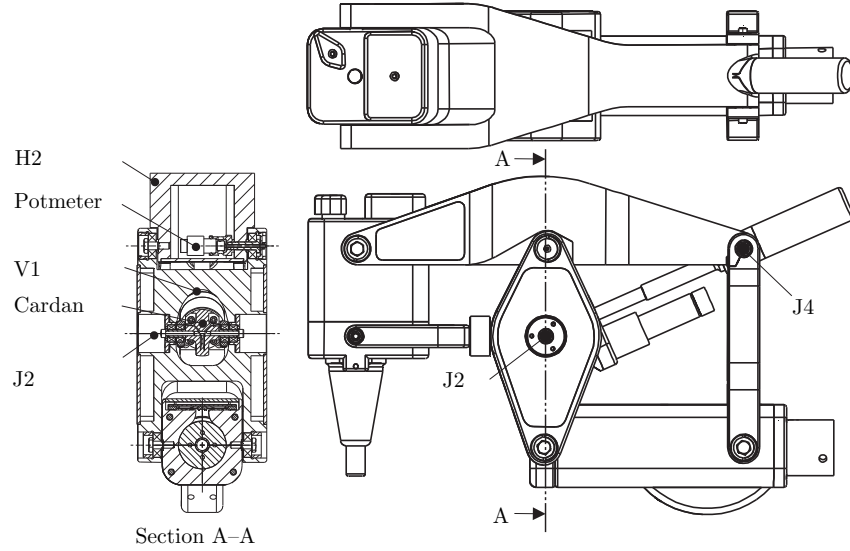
$\Psi$ -DoF ball-screw drive, the cardan in J2 (and J4) allows the screw shaft to align with the nut, the potmeter provides an absolute angle.
